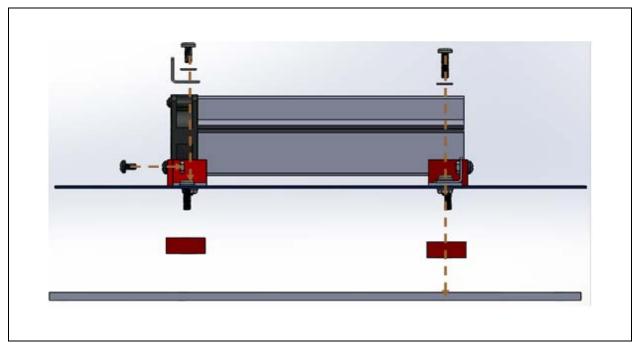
Heat Sink to PCB Assembly – Side View.
